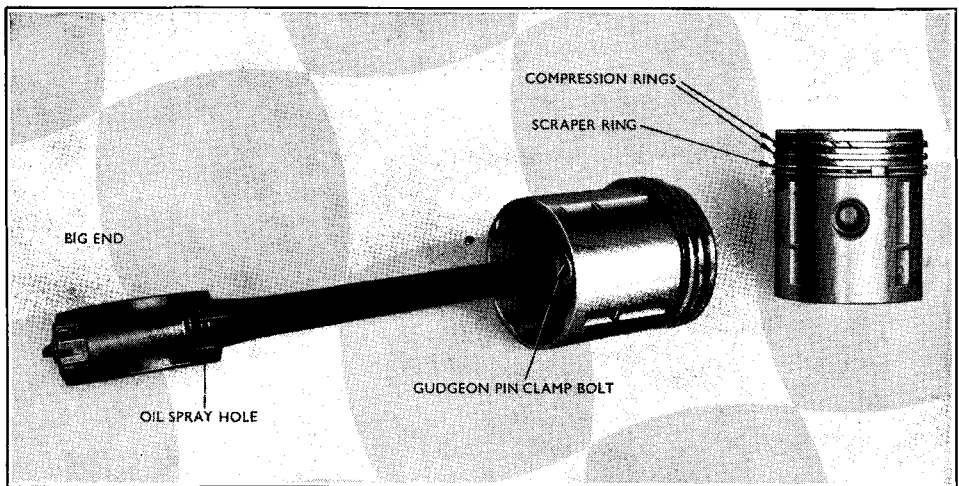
Illustration No. 26.—Piston assembled to connecting rod, also position of piston rings (second type).
